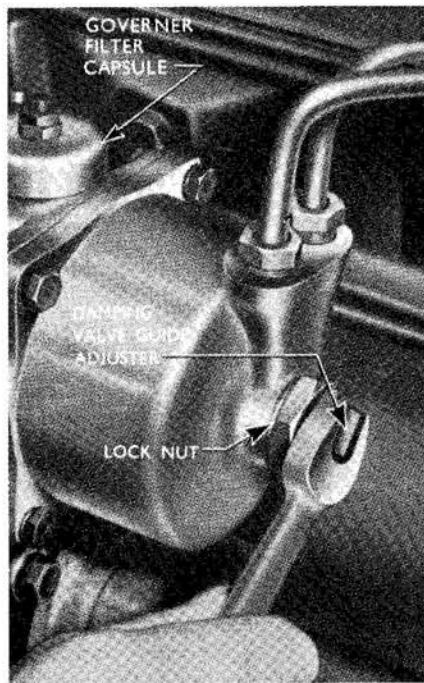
If engine surges at idle speed, or at a slow engine speed at which engine must be run for certain operations, loosen lock nut and slowly turn damping valve guide adjuster back and forth to find position that will most effectively reduce surge.
